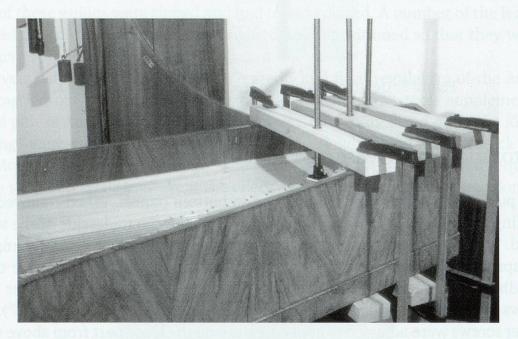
Clamping system devised by author to reglue bass bridge. As pressure is exerted on the bridge from above, the soundboard is supported from below by Jorgensen veneer press screws.
